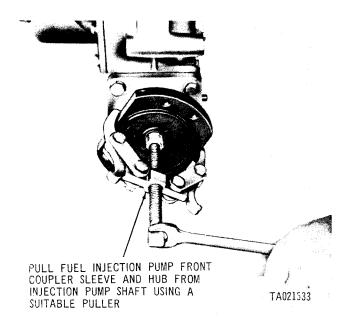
Removing fuel injection pump coupling sleeve and hub.
